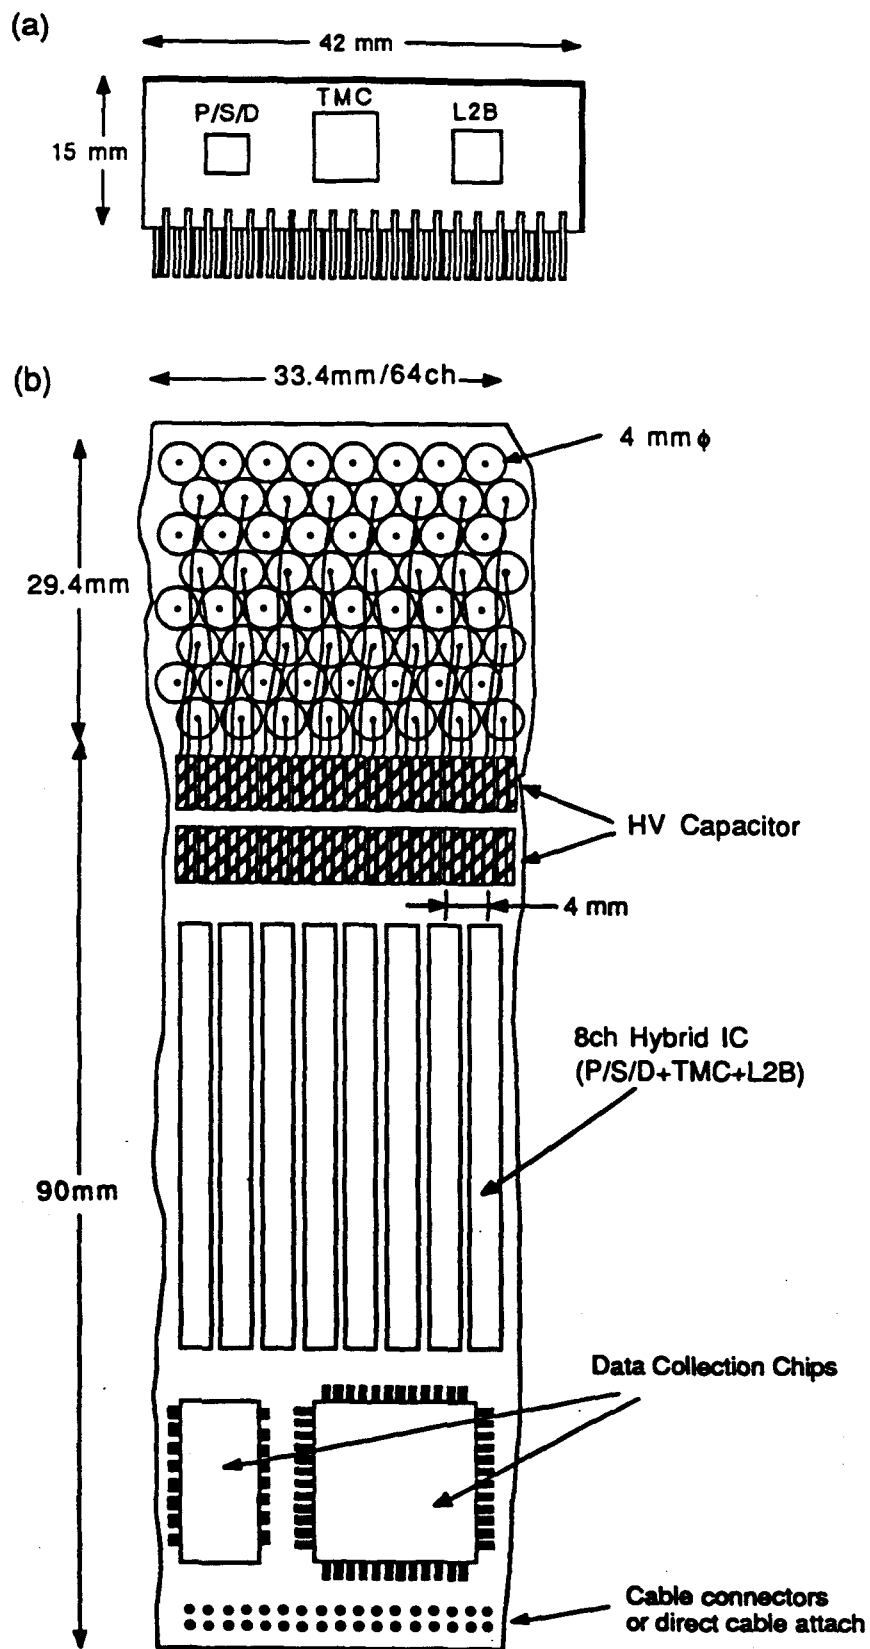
Mounting Example of (a) the Hybrid IC and (b) the Front-End Board.
